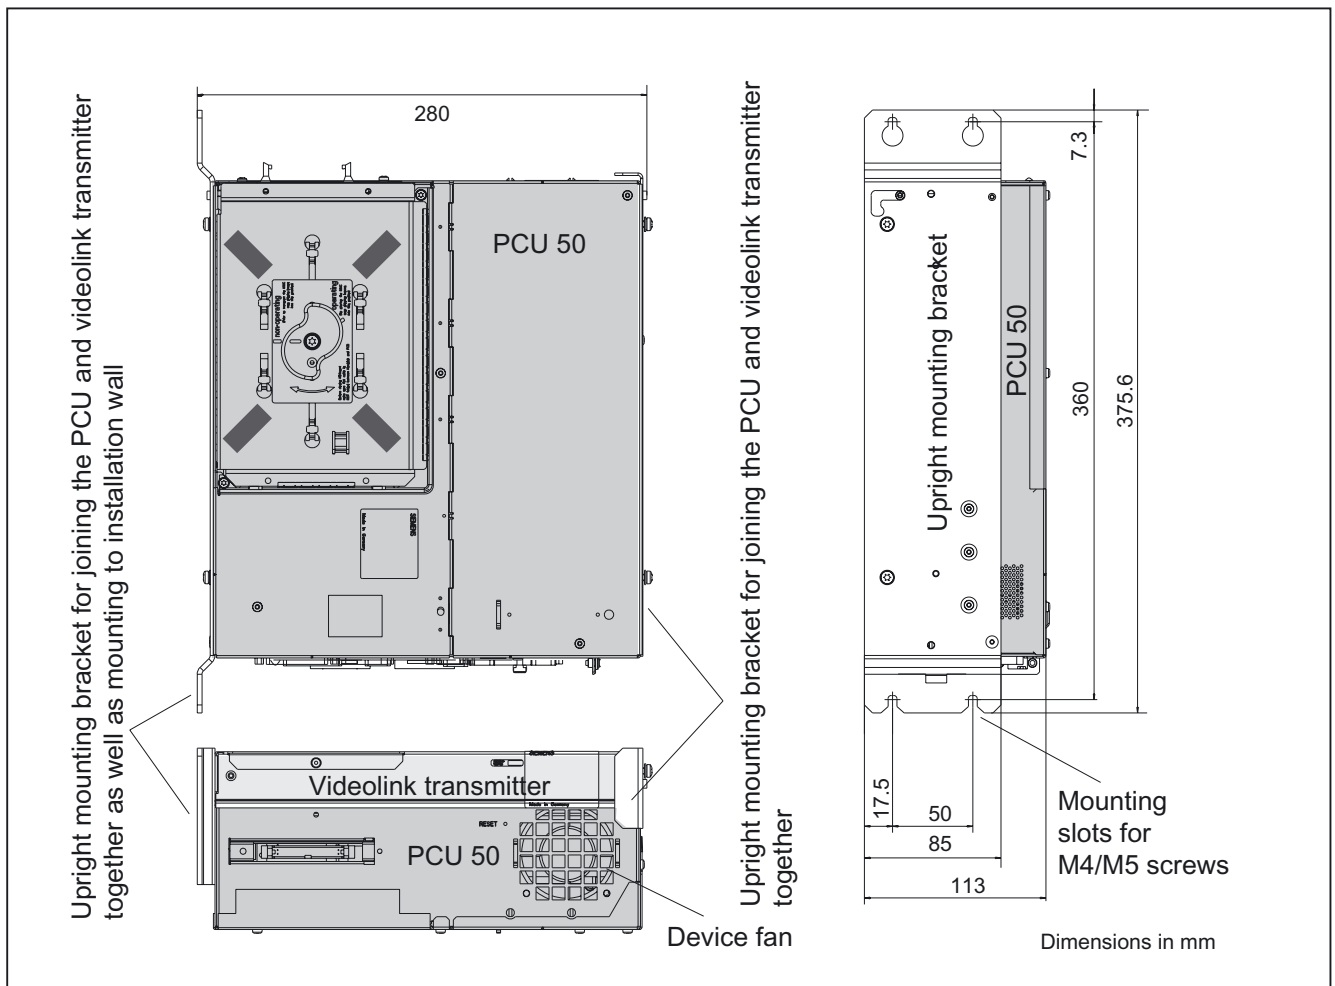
Joining of PCU 50 and videolink transmitter using the upright mounting brackets
